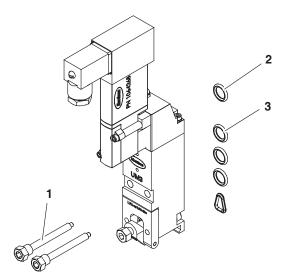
Replacing a module (spray module with flange-mounted solenoid valve shown)
